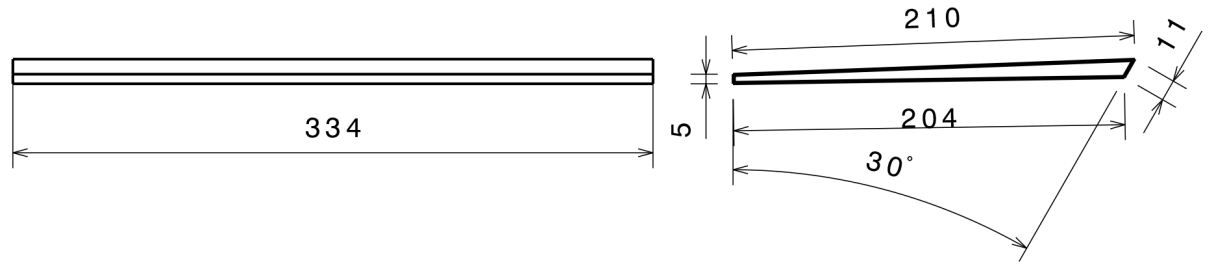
Front and side view of the top part of the trailing edge with dimensions in [mm] and [deg]
